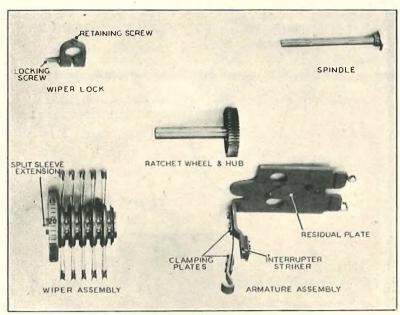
PARTS OF UNISELECTOR TYPE 2.
